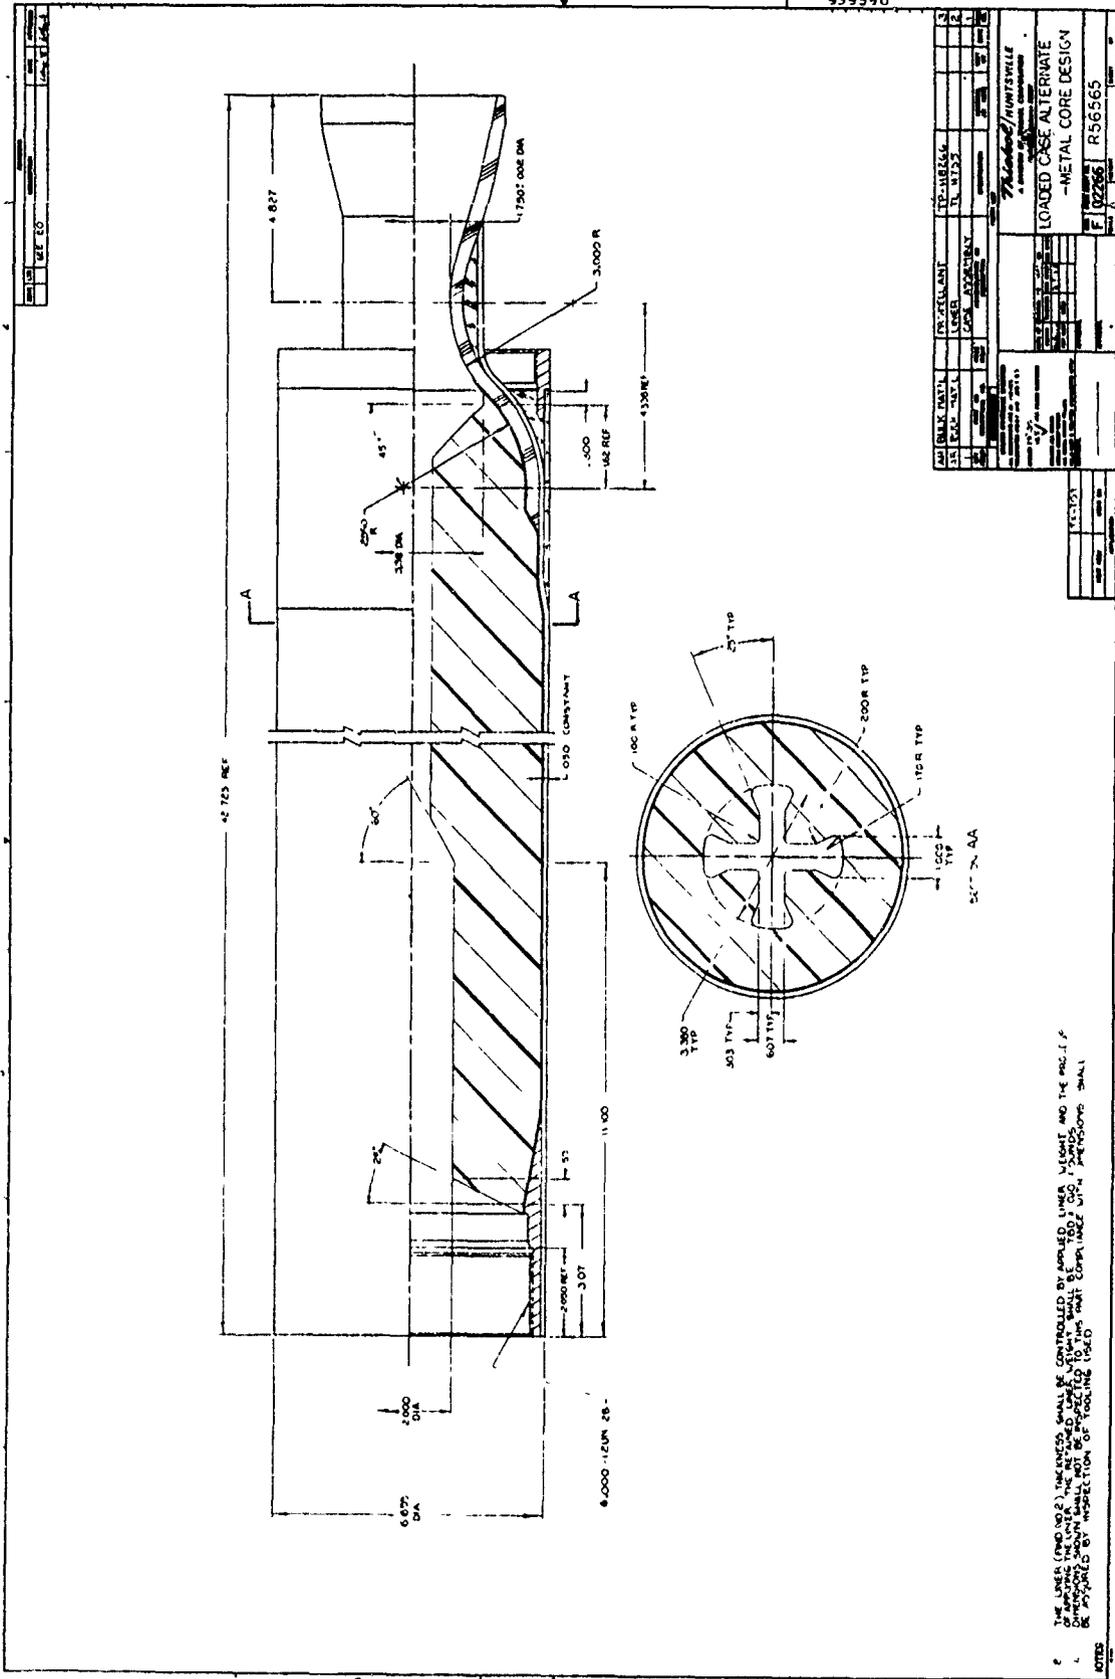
Loaded Case Alternate - Metal Core Design (R56565)
